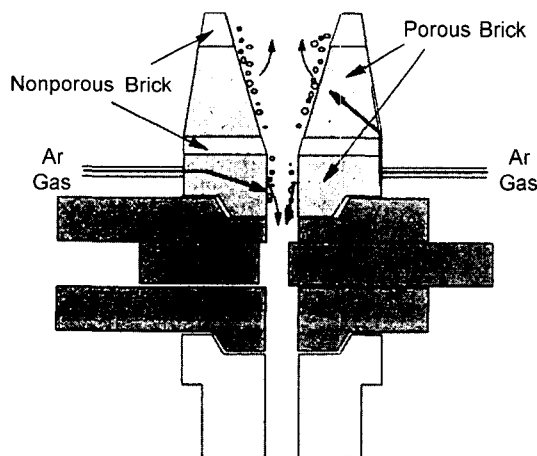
Advanced tundish nozzle with argon gas injection into upper and lower bore.¹²⁾
